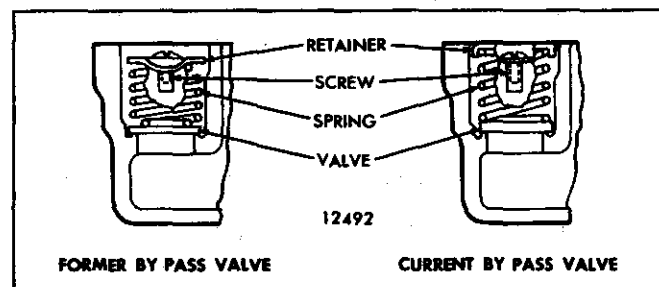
Bypass Valve Assembly Secured by Retainer and Screw
